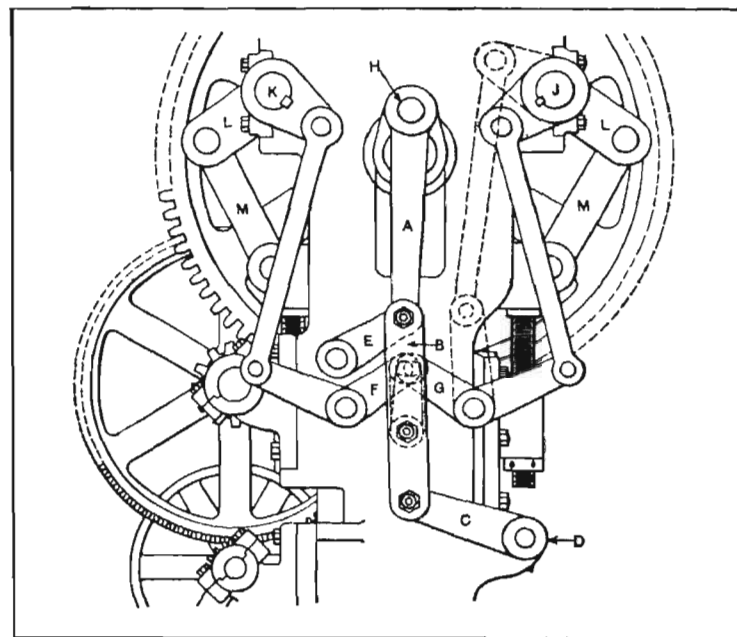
Application of Toggle Mechanism to a Drawing Press
